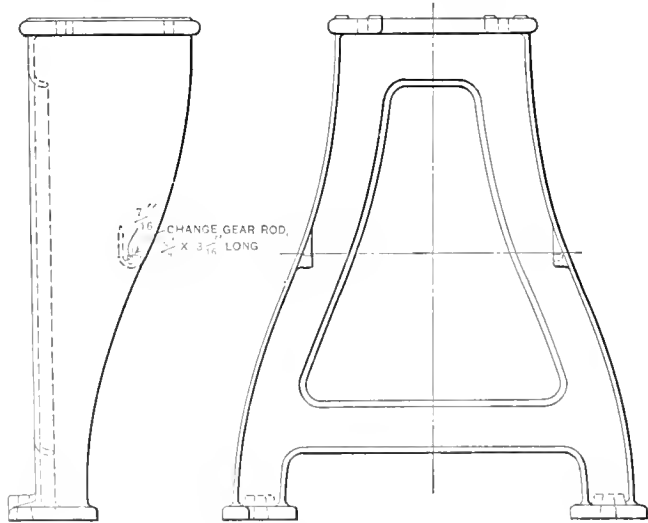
View showing the Change Gears stored beneath the Lathe.
